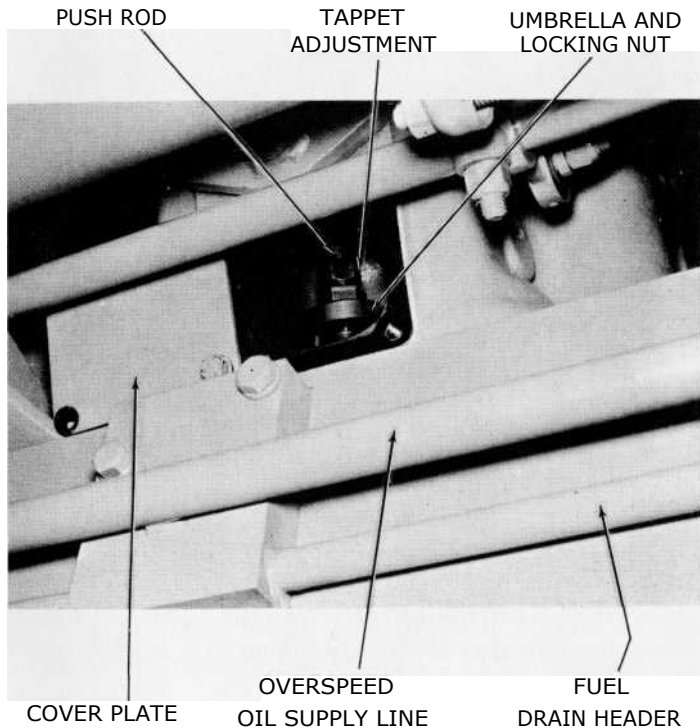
Fuel-injection pump tappet-rod adjustment
